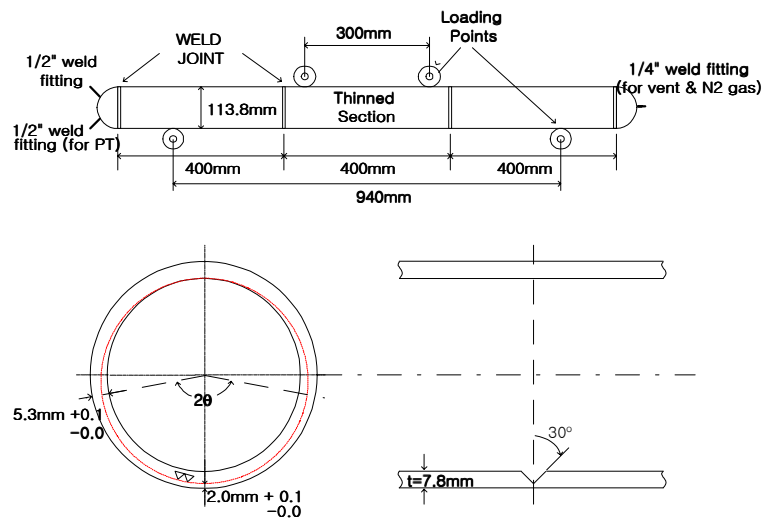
Geometry of pipe specimen and local wall thinning shape.
